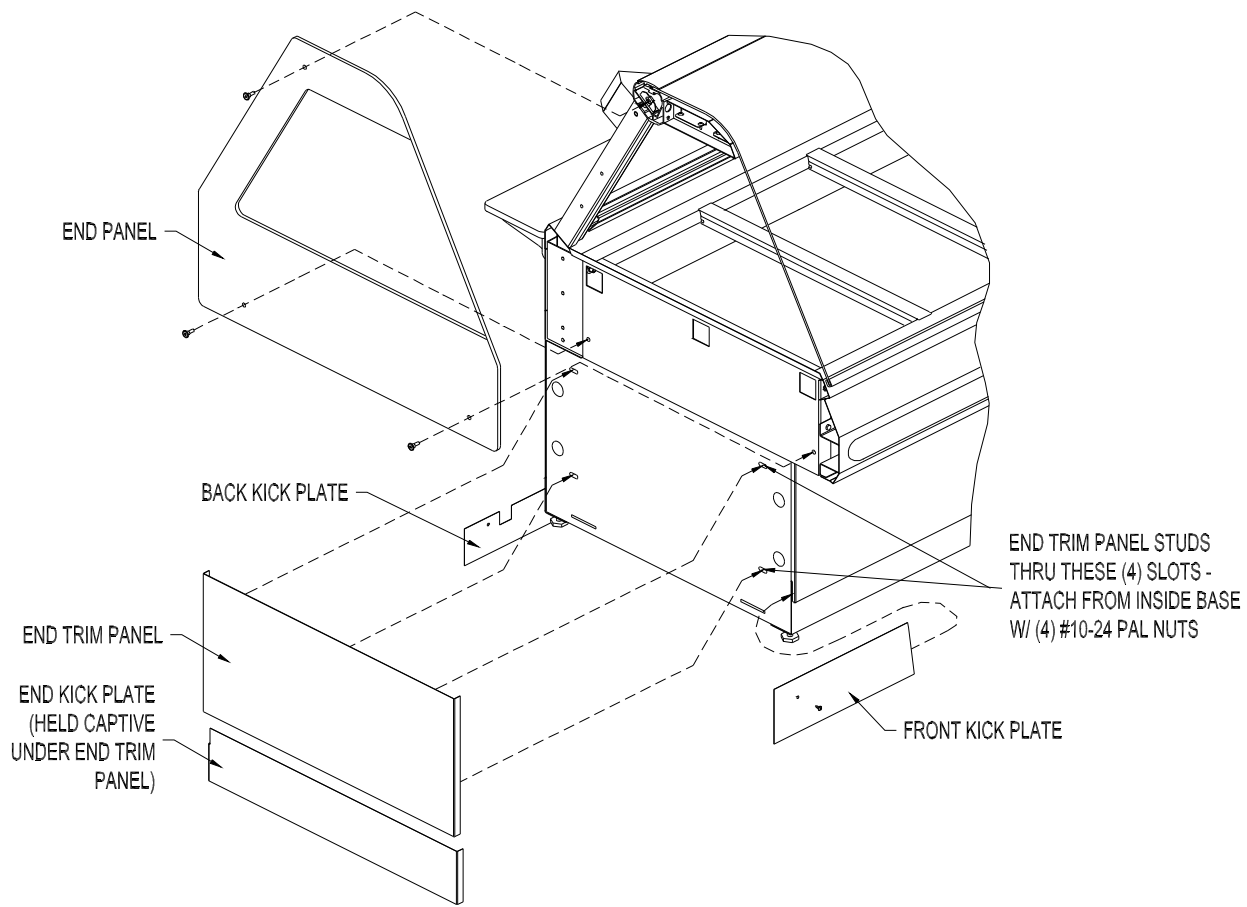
Floor Model - End Kick Plate & End Panel Mounting
